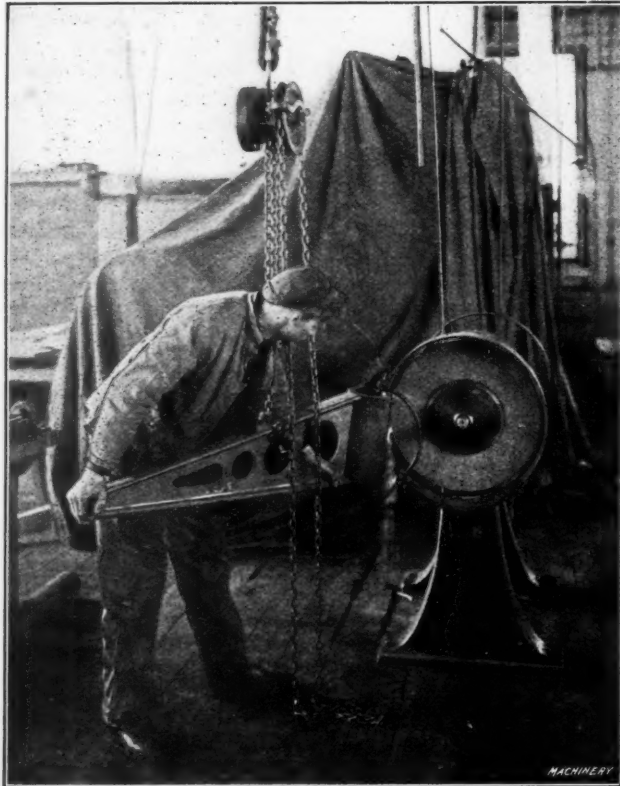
Snagging a Heavy Casting supported by a Chain Hoist
